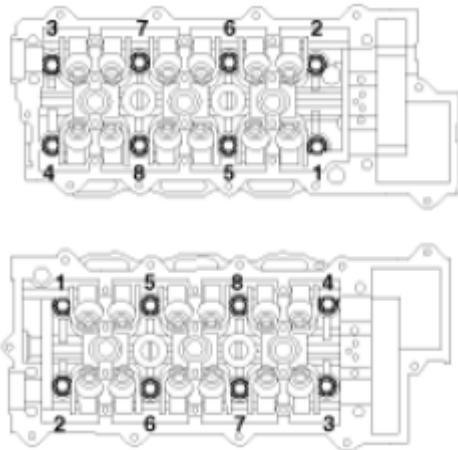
Identifying Cylinder Head Assembly And Bolts In Sequence
